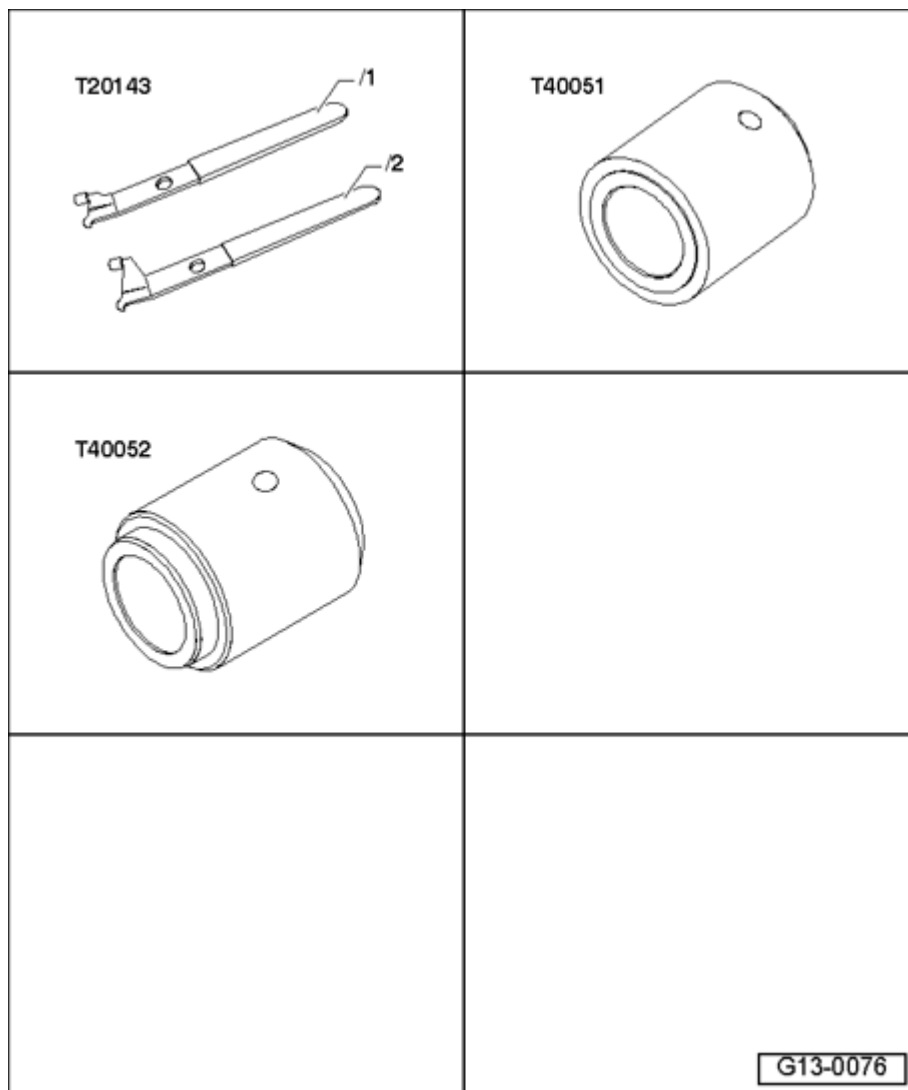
Identifying Special Tools - Seals For Power Take-Off, Replacing
